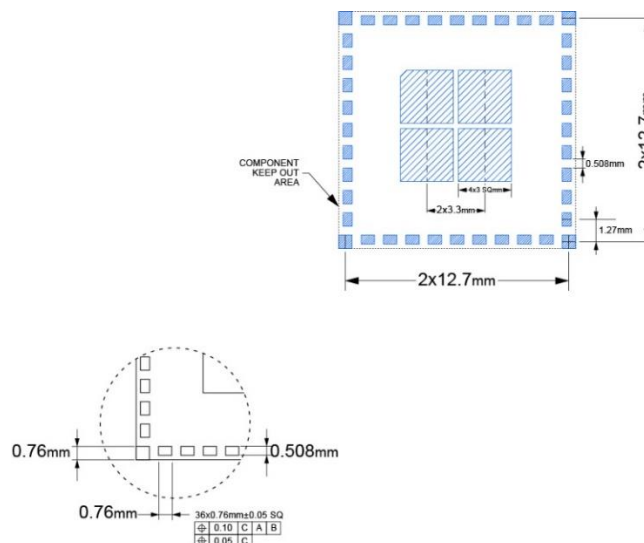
CQM730-0-50-1P Module PCB Landing Pattern
